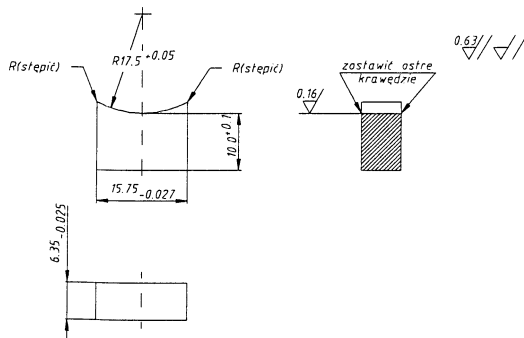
The shape and dimensions of specimen (block) with concave friction face [2]
